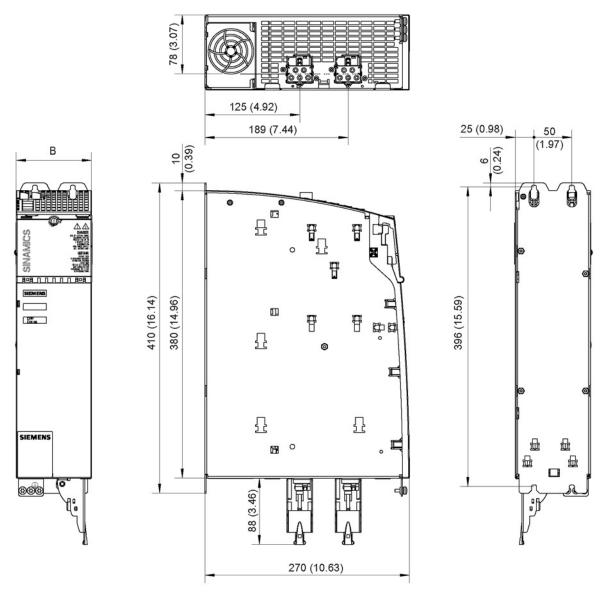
Dimension drawing of Motor Modules Booksize with internal air cooling 30 A and 2 x 18 A, all dimensions in mm and (inches); example: Double Motor Module 2 x 18 A
